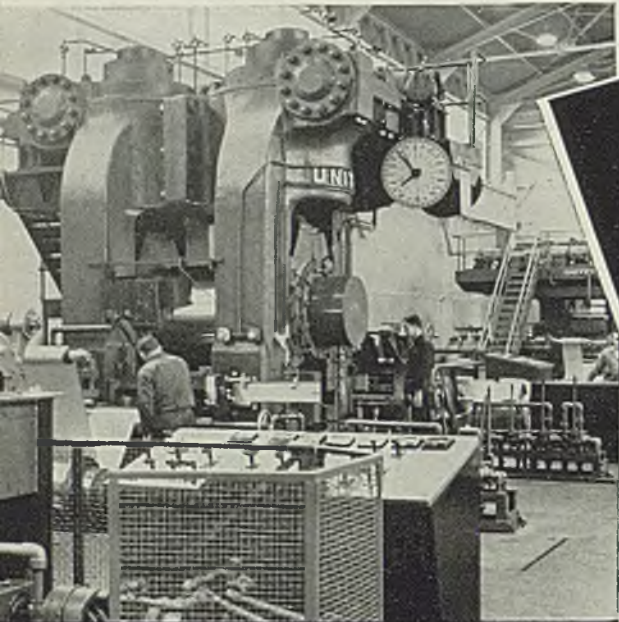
(Below)—National Broach & Machine Co. sectional type Naloy surface broaches operating on cylinder blocks in Cincinnati Hydro-Broach machine
